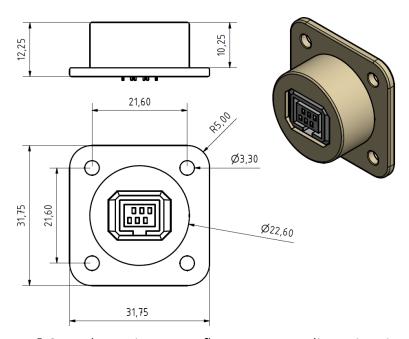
SMARTsat® OEM I low noise sensor flex connector - dimensions in mm
